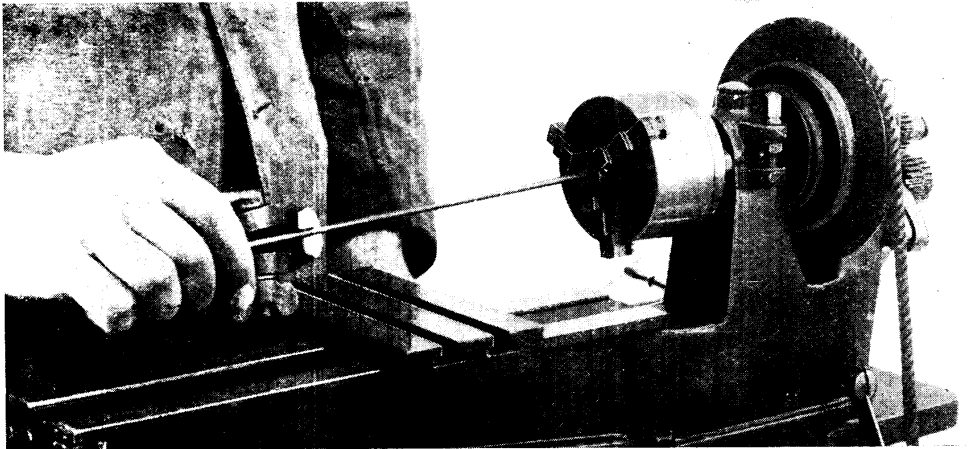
By reversing the die in the die stock, a clean thread can be cut to the face of the shoulder on a square spindle. Spindles requiring this operation are frequently used in variable condensers
